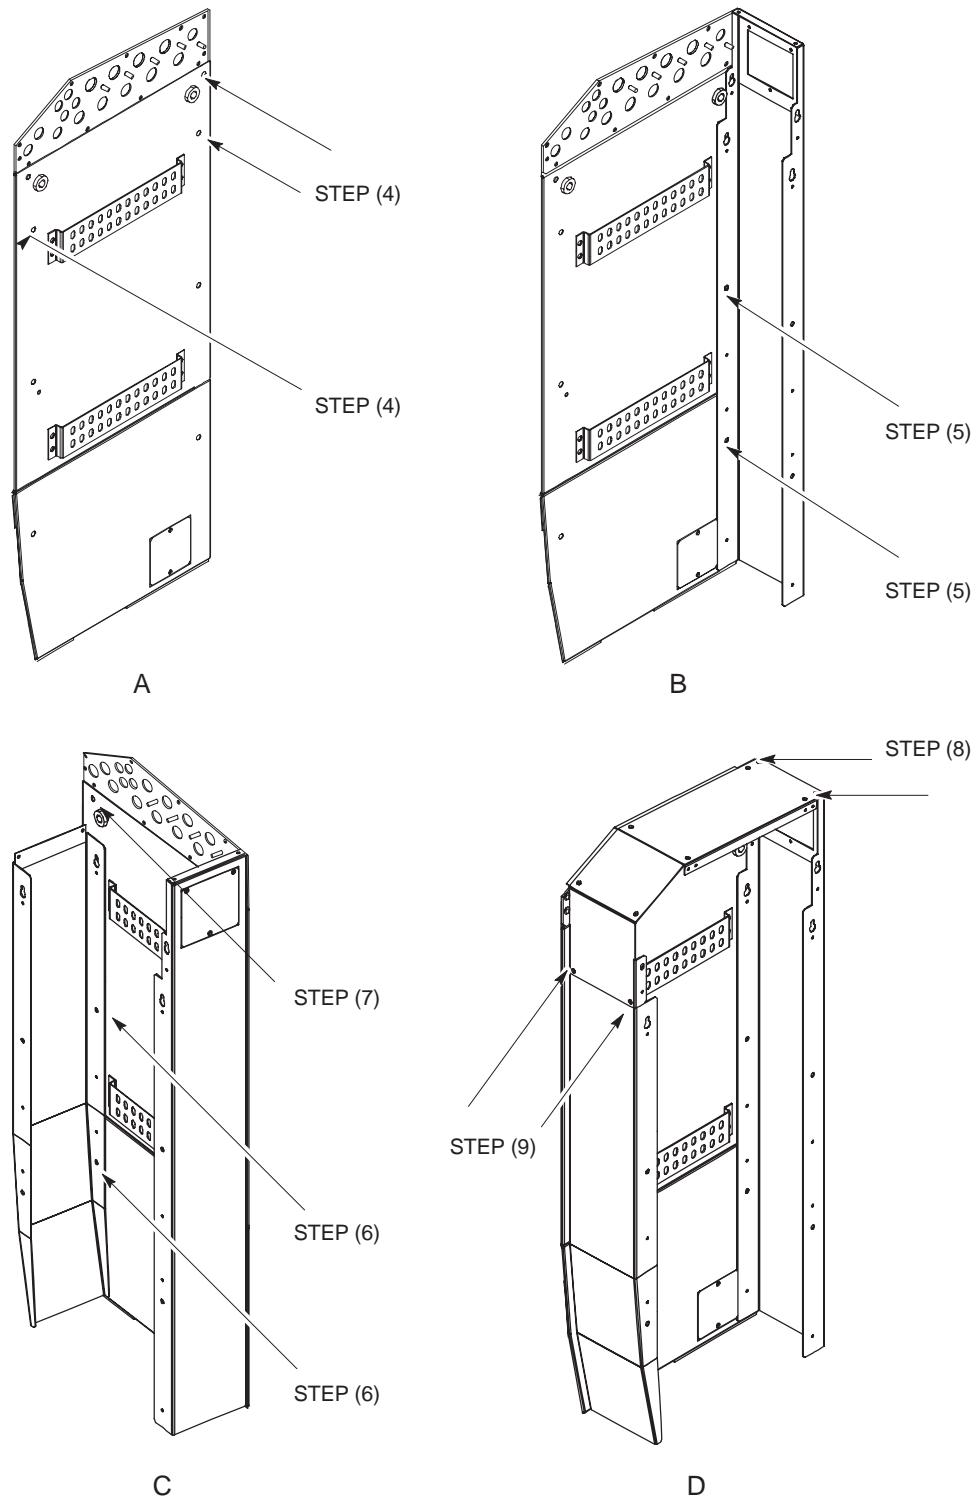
Fixing the cable shroud frame to the left side of the cabinet
